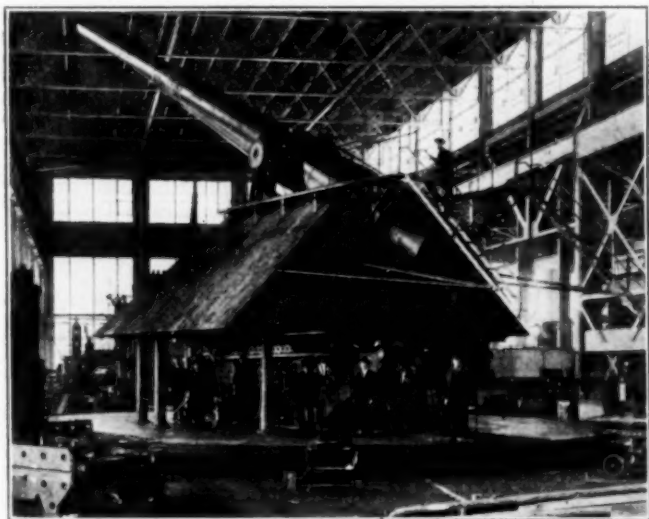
16-IN. DISAPPEARING CARRIAGE, MODEL OF 1917
